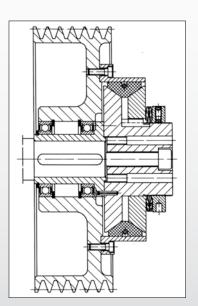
Conax® Slipping Clutch type CR-F with V-belt pulley
